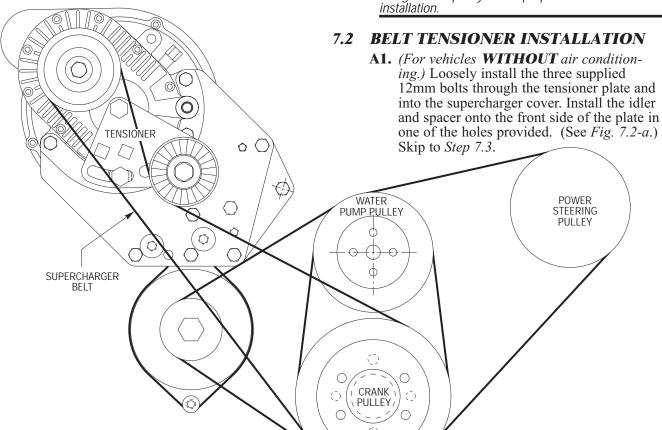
a / Passenger Side Supercharger Belt Routing (Driver Side Similar)
